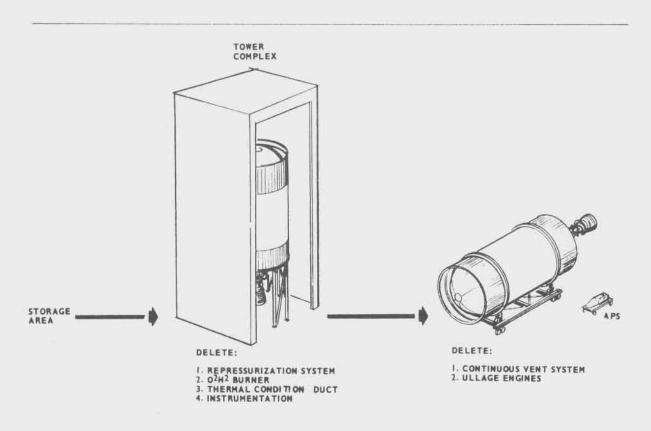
Manufacturing Plan, Retrofit INT-20/S-IVB Stage
